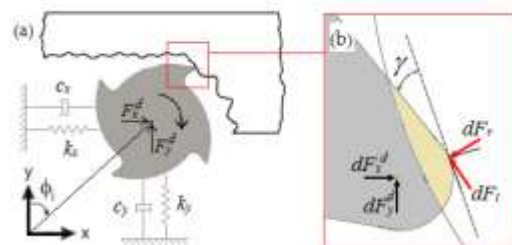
Dynamic milling with process damping. (a) cross section of a helical end mill, (b) flank-workpiece interaction.
